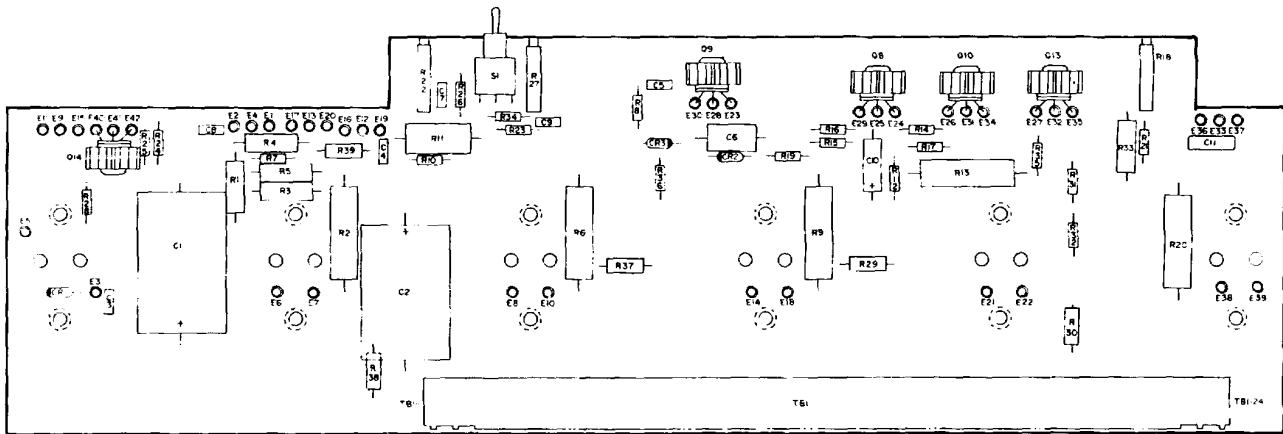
Modulator Circuit Card Assembly, 1A4A4A1 Parts Location Diagram
